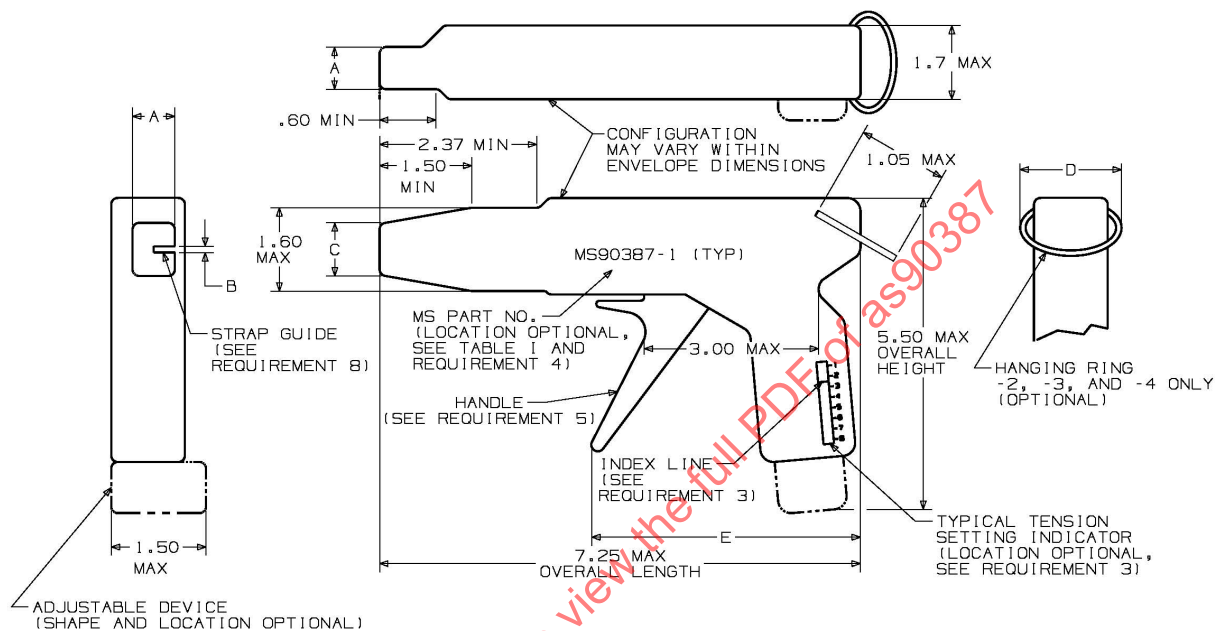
MS90387 TOOL DIMENSIONS AND CONFIGURATION (SEE DESIGN REQUIREMENTS)
